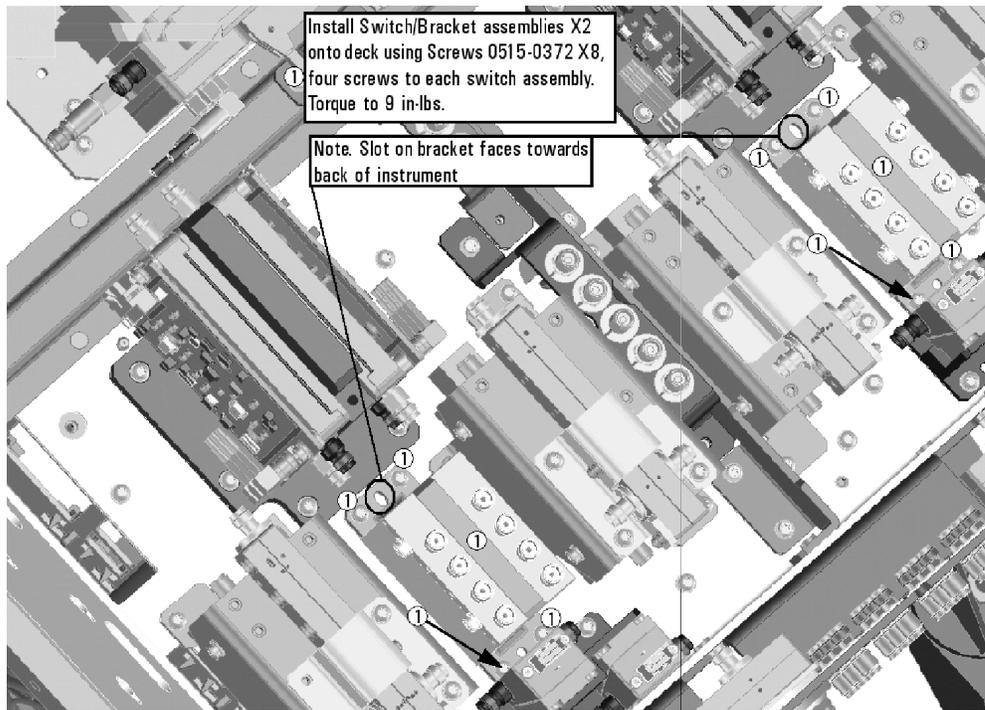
Mechanical Switch Assembly (0515-0375, N1811-80010, N5247-20130)
